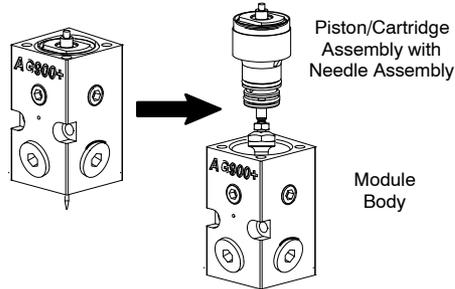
Removing piston/cartridge and Needle Assembly from Applicator Module Body
